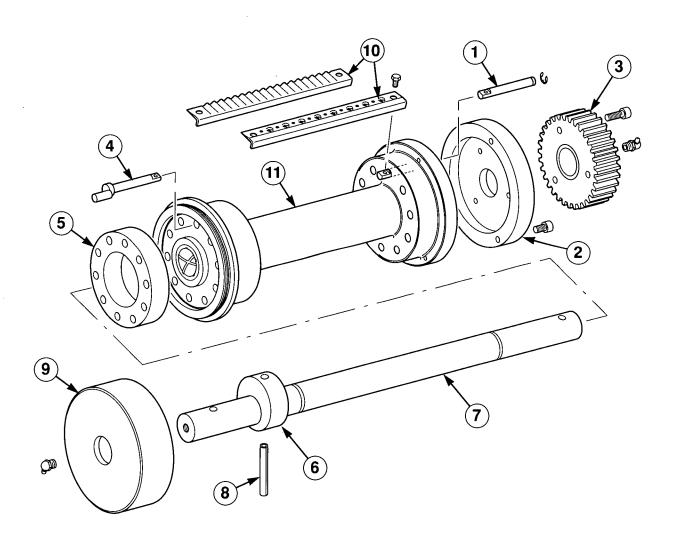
Crosscut spindle assembly: 7, 8, 10, 12, 14 and 16 knives. (1) Idler Pin, (2) Drive Cap, (3) Gear, (4) Crank Pins, (5) Crank Bearing Block, (6) Eccentric, (7) Shaft, (8) Spring Pin, (9) End Cap, (10) Knife, (11) Spindle.
